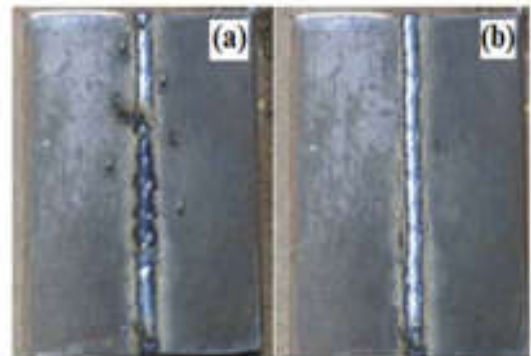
mild steel plates after welding (a) MAW (b) MIG welding
